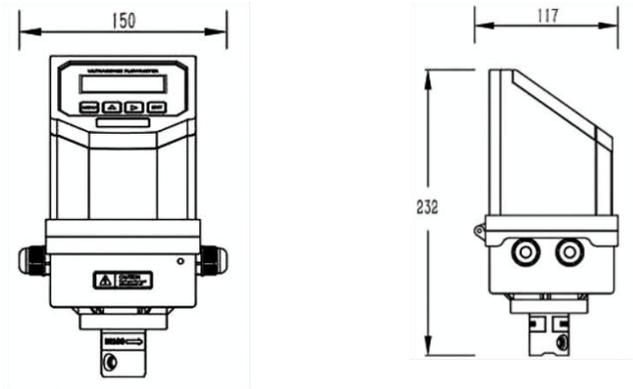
Dimensions of Integrated Inline Sensor (unit: mm)
